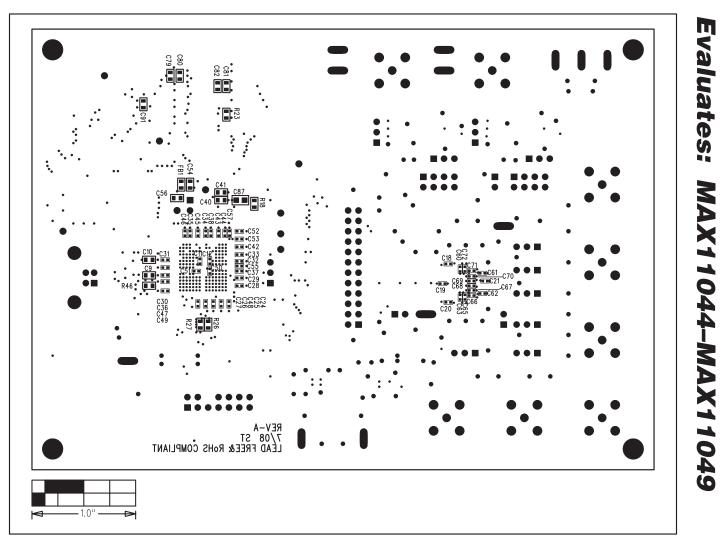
MAX11046 EV Kit Component Placement—Solder Side
